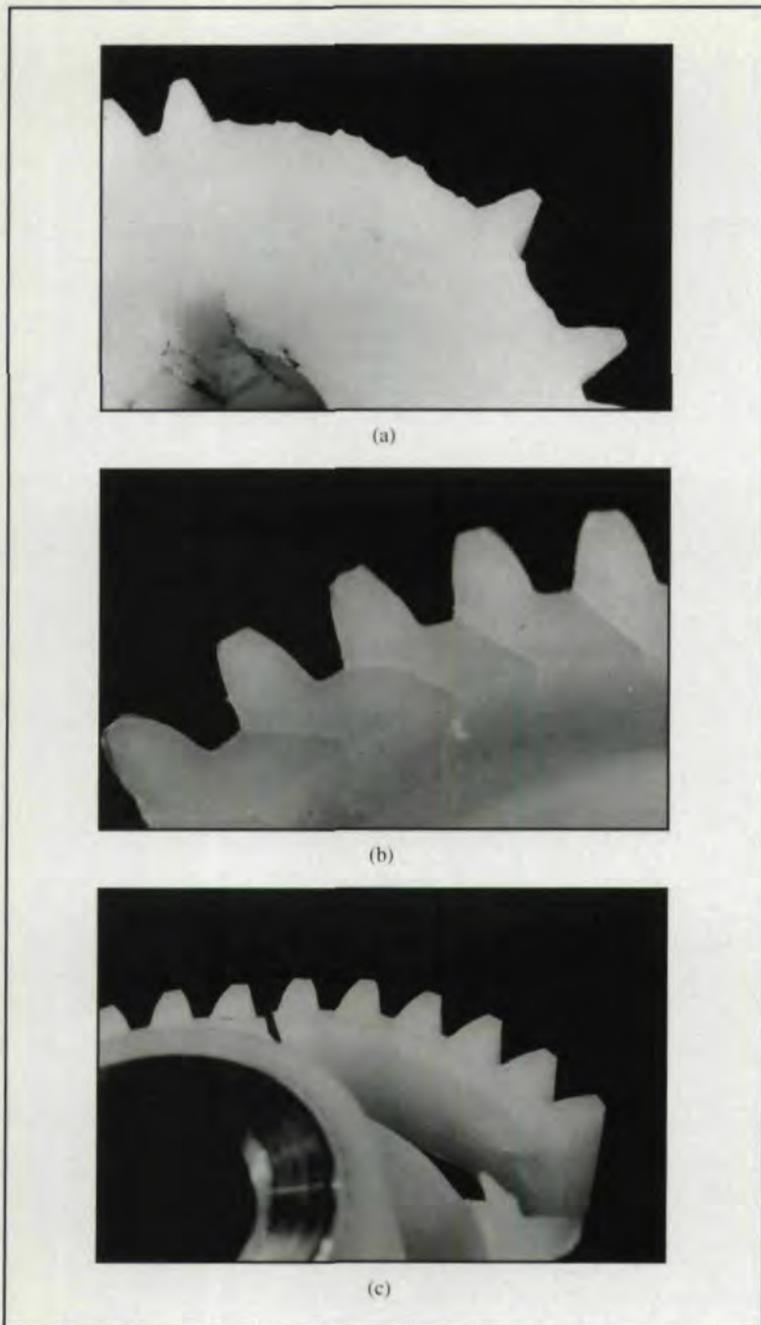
Modes of rim failure for nonmetallic gears for (a) a solid gear and (b–c) thin-rimmed gears.
